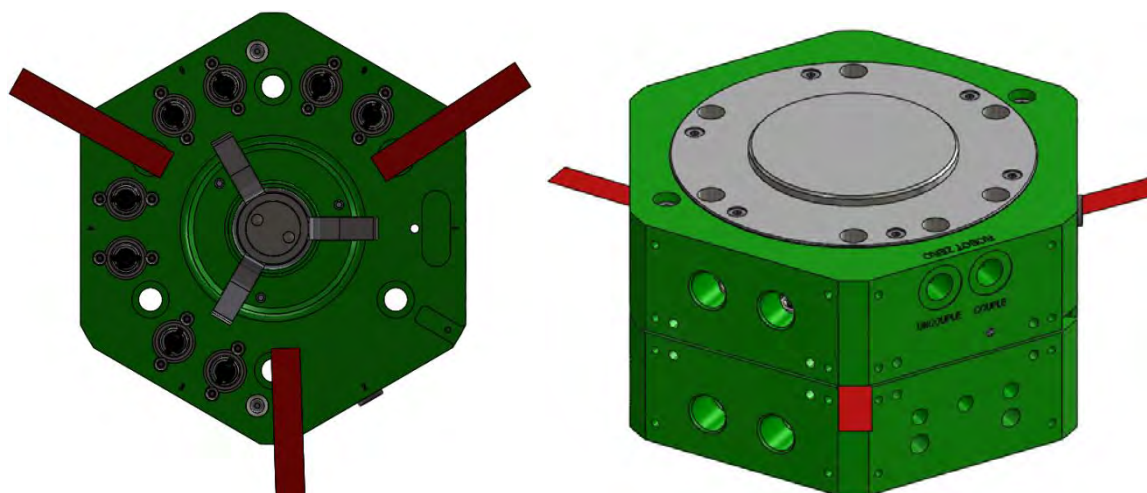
Shim Test of the Cam Locking Mechanism
